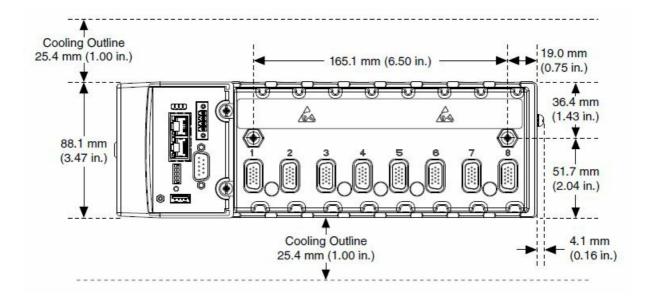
Eight-Slot Reconfigurable Embedded Chassis with the Controller Installed, Front View with Dimensions
